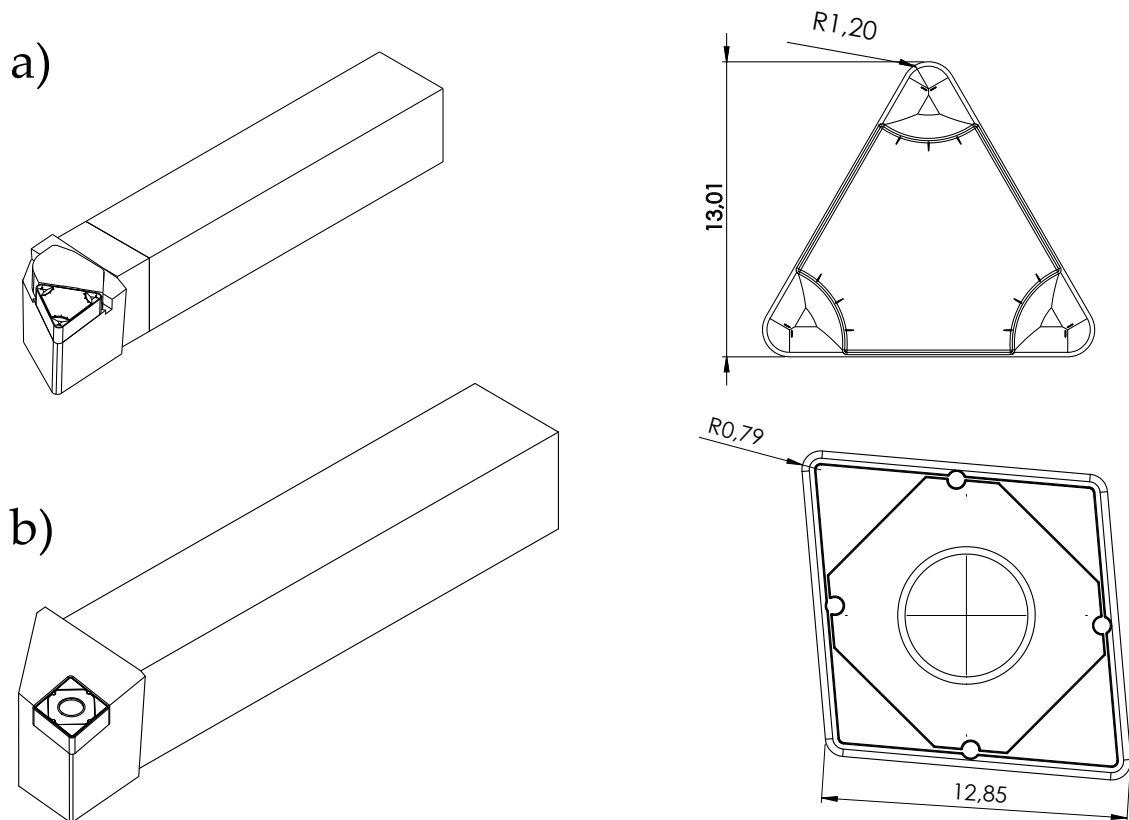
(a) tool 1, (b) tool 2 cutting tool geometry
